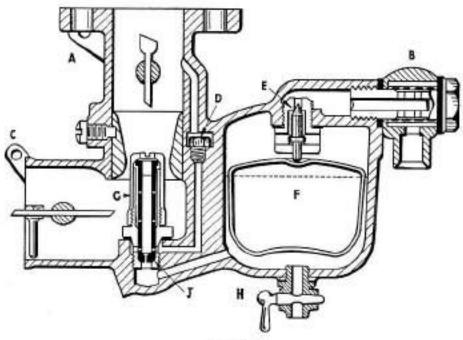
SOLEX TYPE 30 FV CARBURETTER
